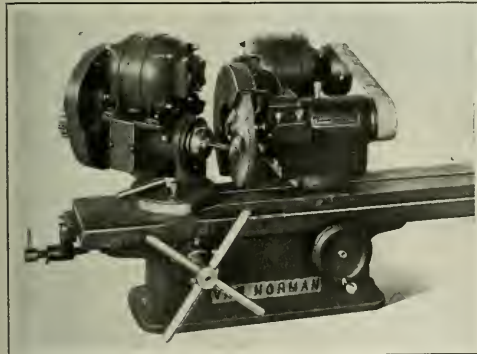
Grinding an Automobile Engine Valve with Work-head set in an Angular Position
